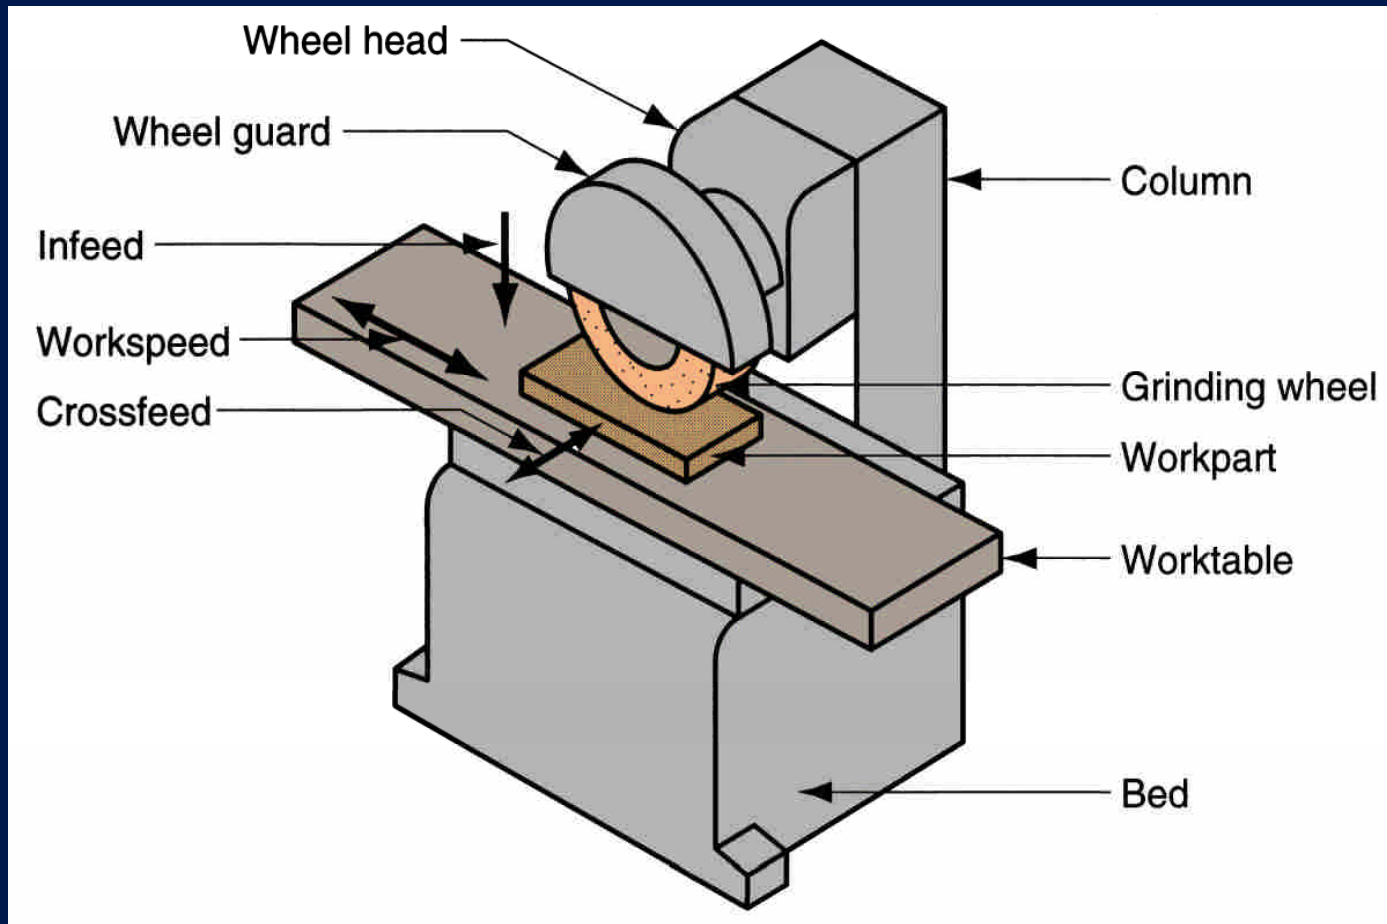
Surface grinder with horizontal spindle and reciprocating worktable (most common grinder type)
